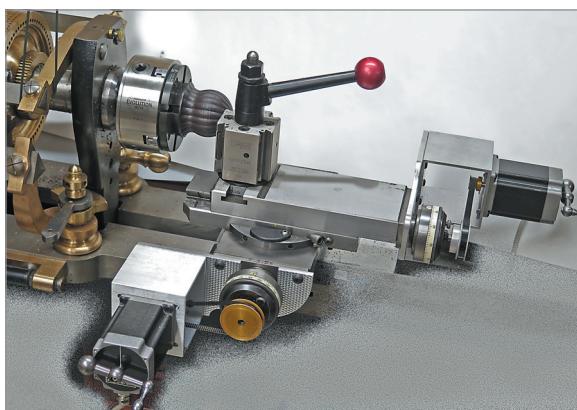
An ornamental lathe retrofitted with CNC drives and controls
